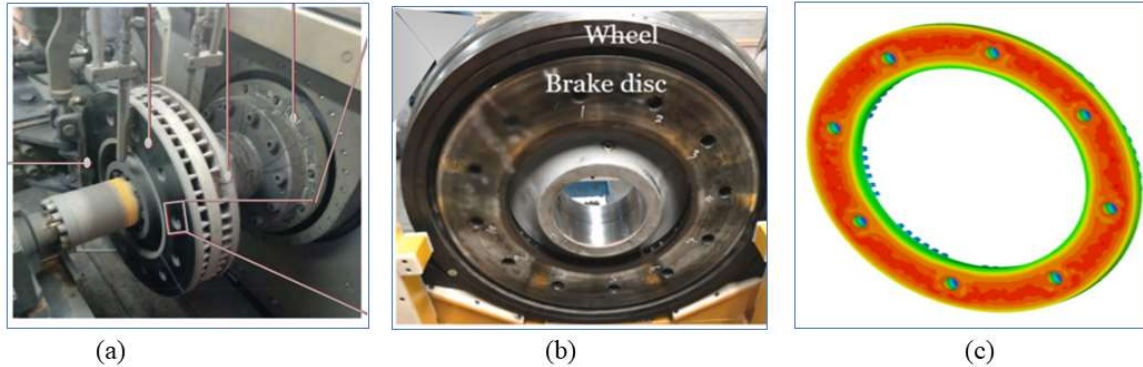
Friction surface-bolted disc brakes: (a) axle mount [30], (b) web-bolted wheel mount [19], (c) web-bolted wheel mount 3D FE model [57][56]
